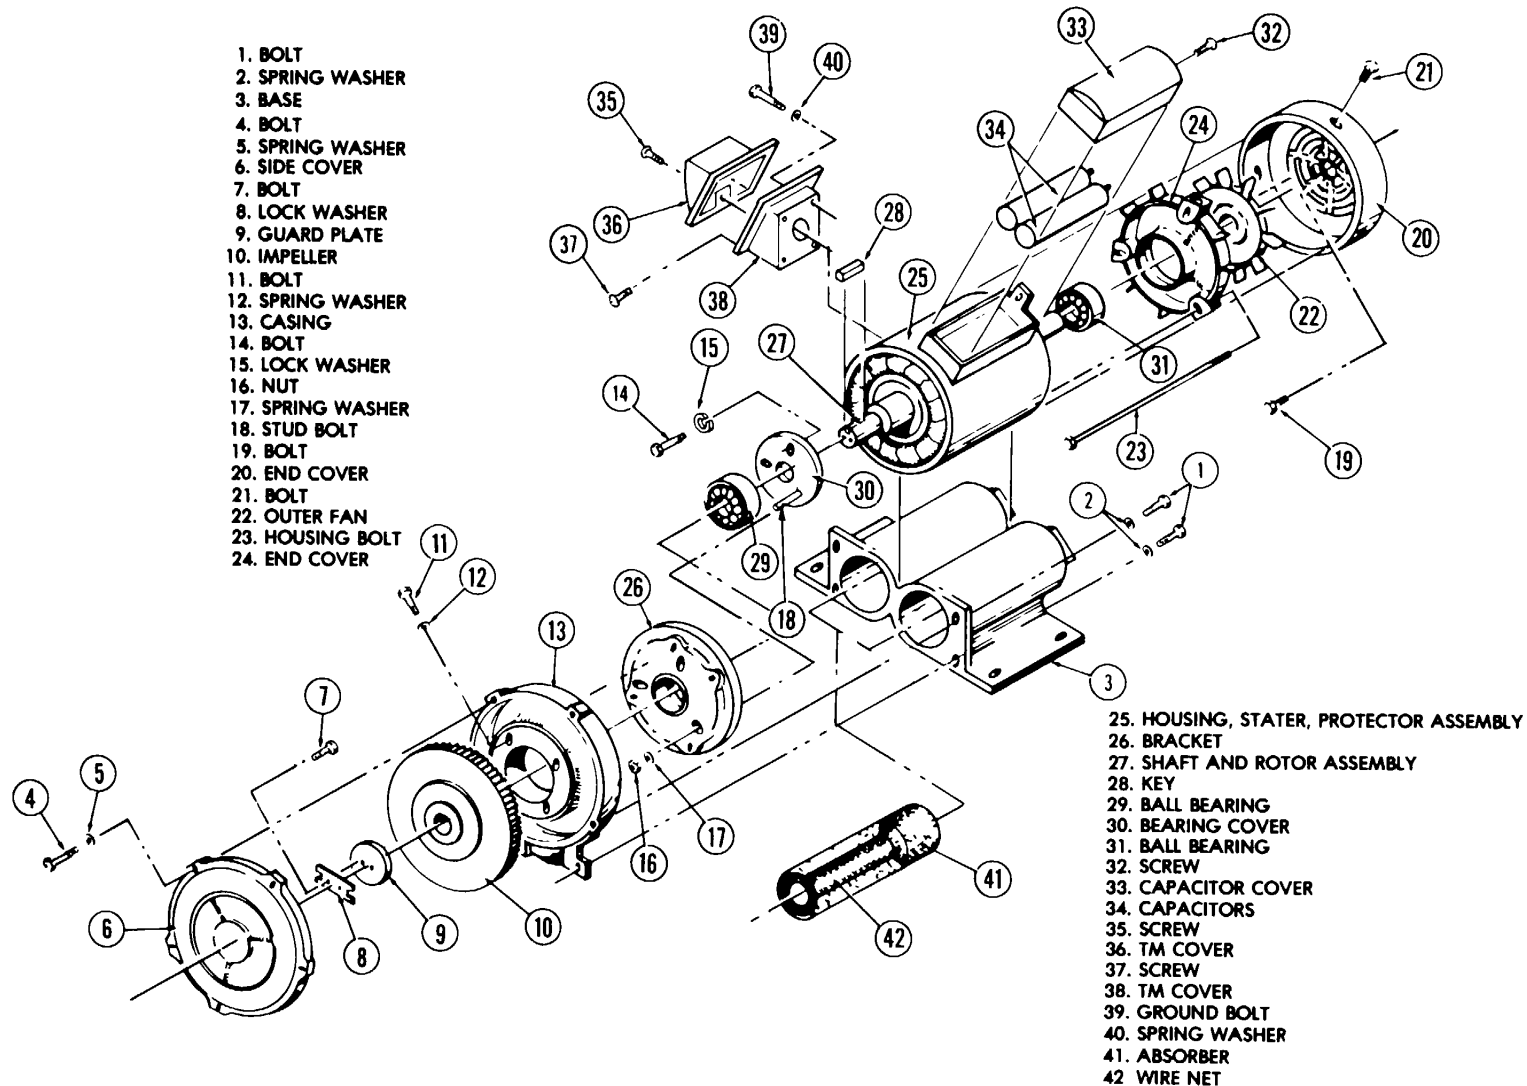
Vacuum Blower Assembly (Model 1969M).
